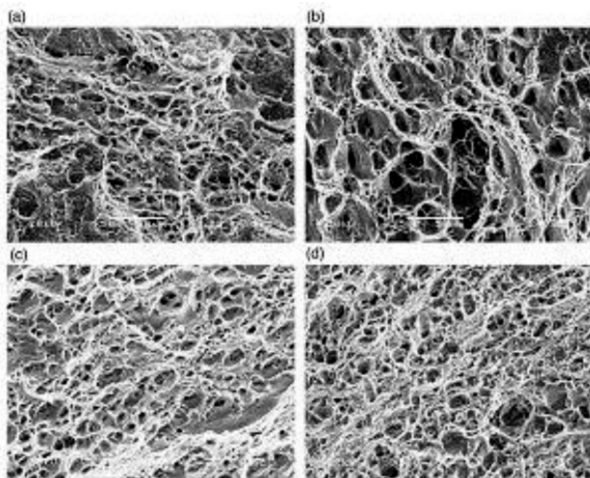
SEM fractographs of the weld centers of tensile tested specimens. (a) As-welded (AW) joint, (b) solution treated (ST) joint, (c) solution treated and aged (STA) joint, (d) artificially aged (AG) joint - K. Elangovan *et al* [26]
